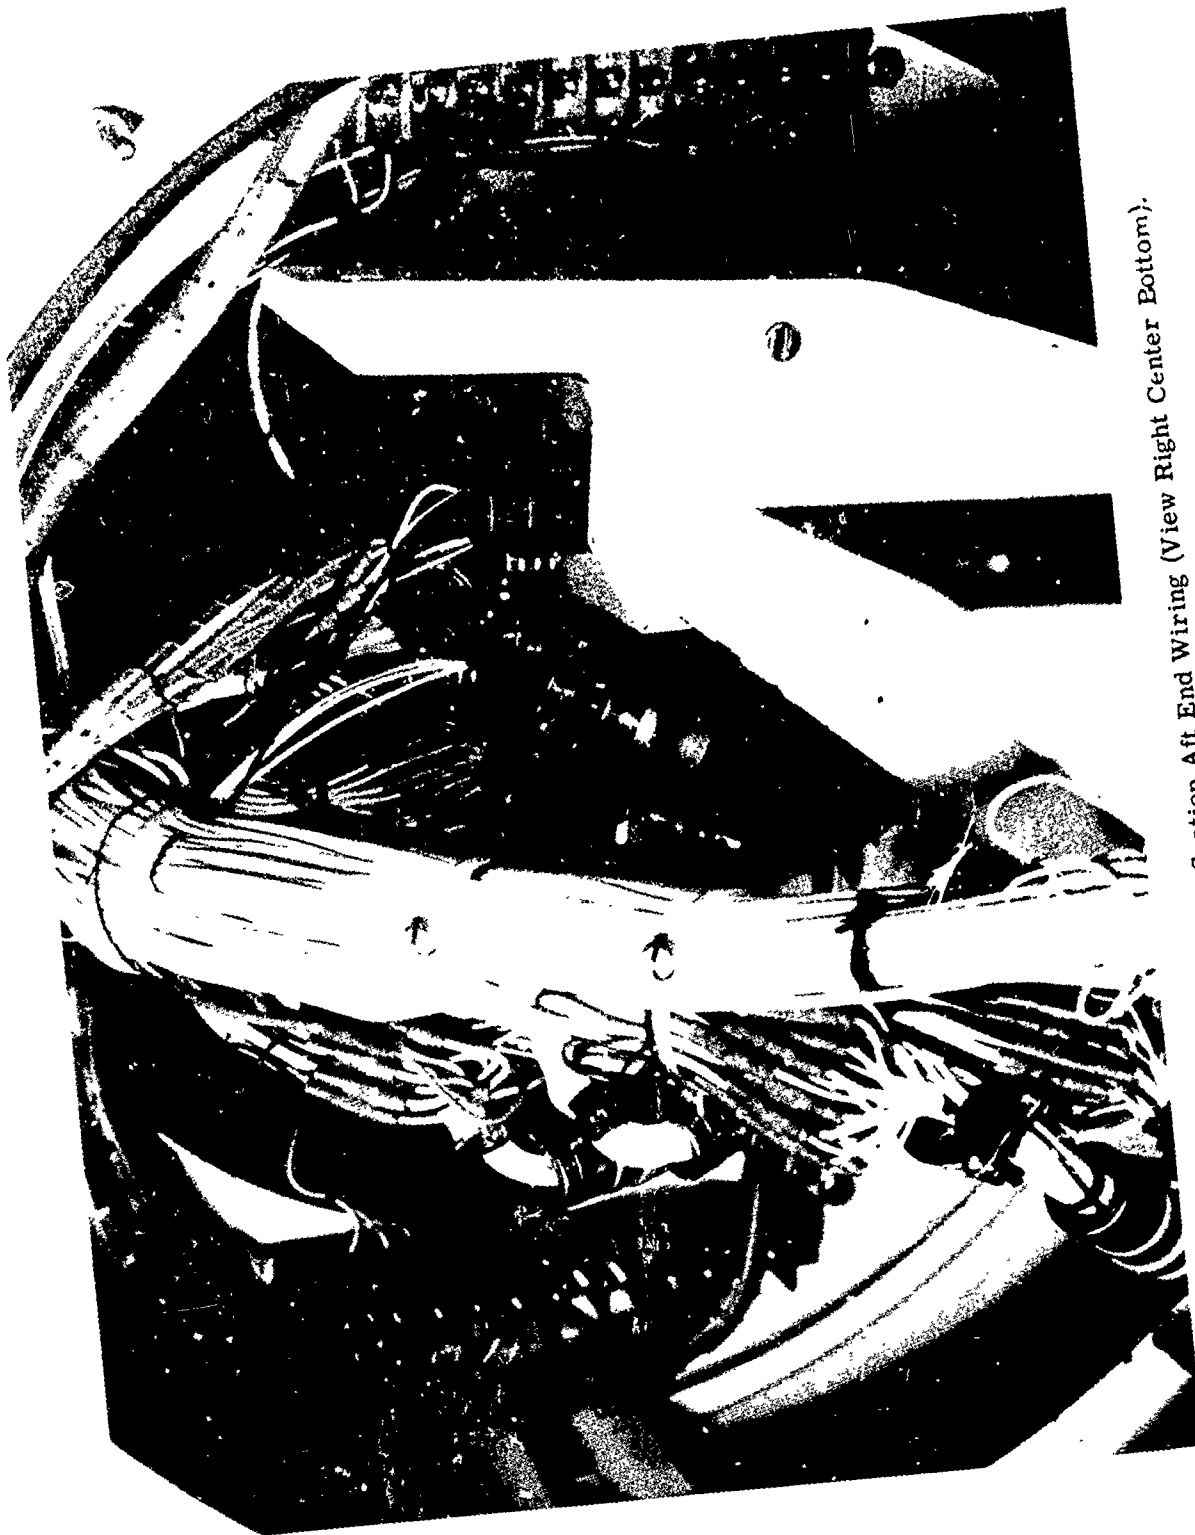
Pod 1 Center Section Aft End Wiring (View Right Center Bottom).
